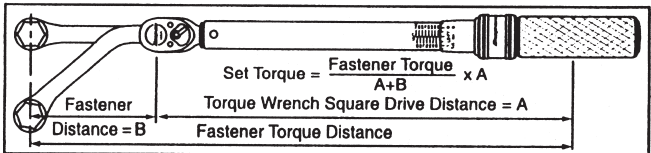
Fastener torque is greater than torque wrench square drive torque.
